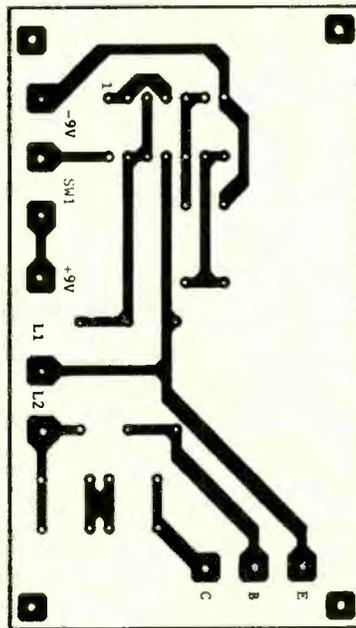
Actual-size etching-and-drilling guide for fabricating printed-circuit boards.
